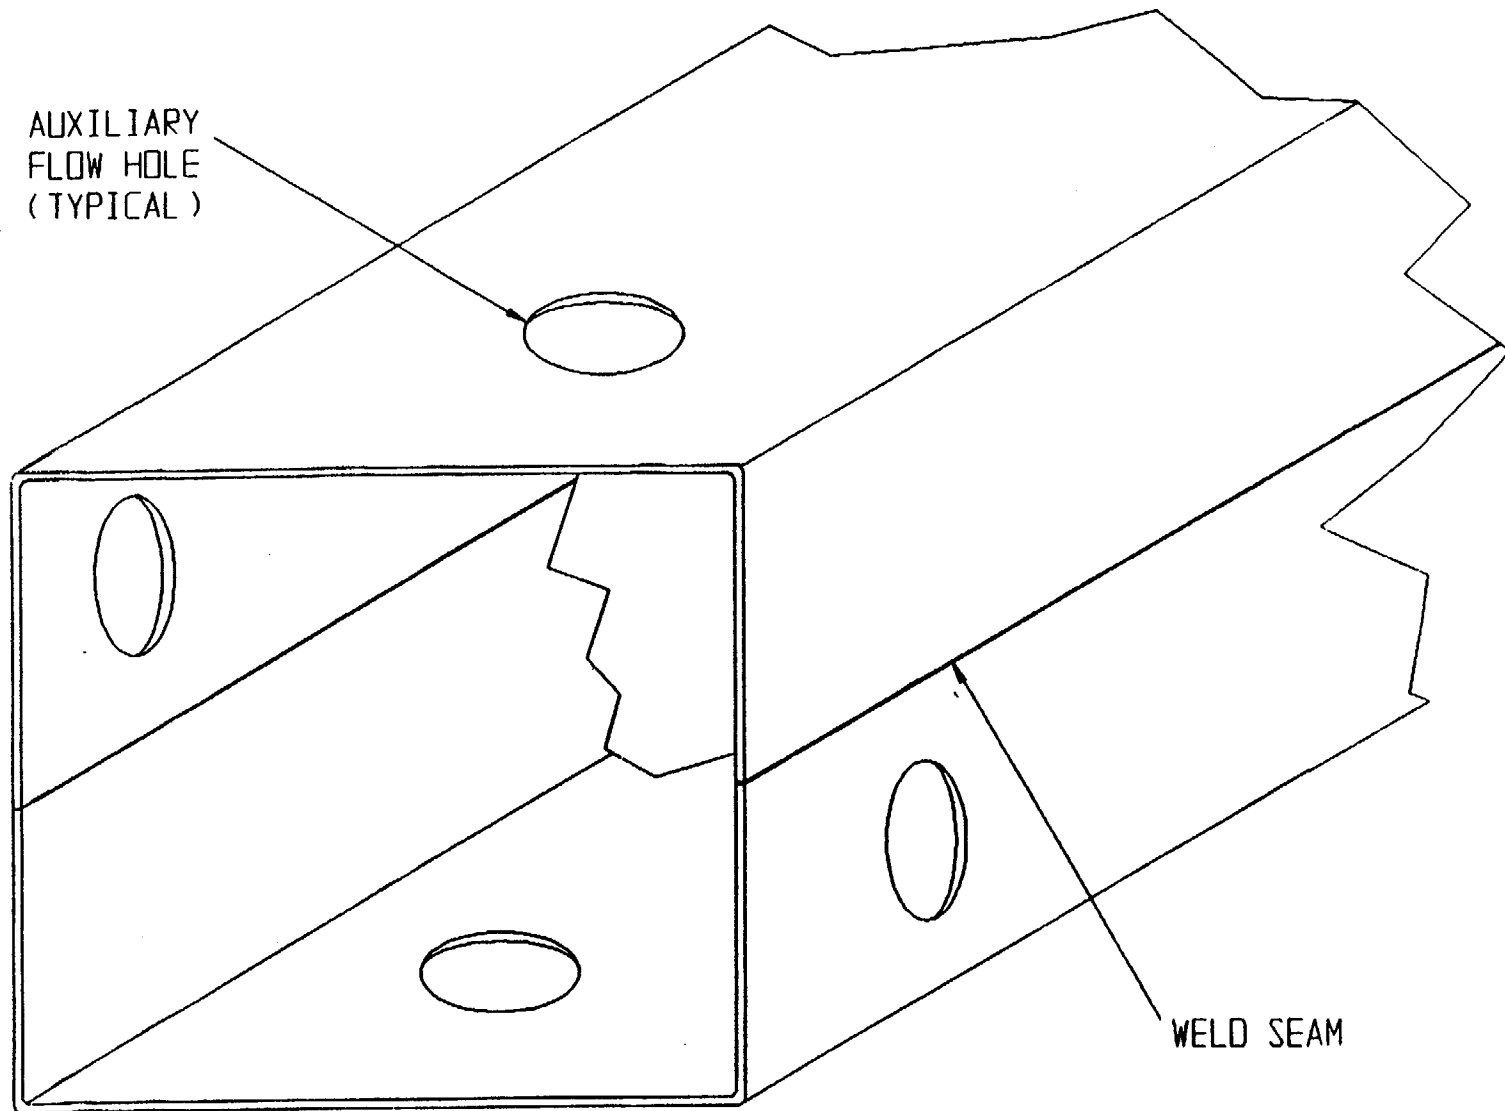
; SEAM WELDED PRECISION FORMED CHANNELS
